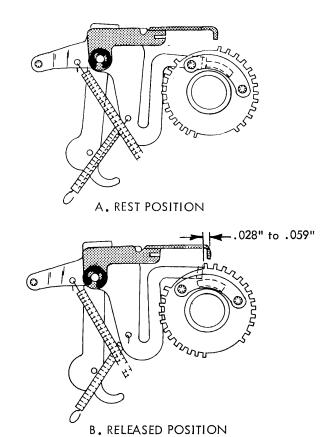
Shift Clutch Spring Retaining Plate Adjustment
